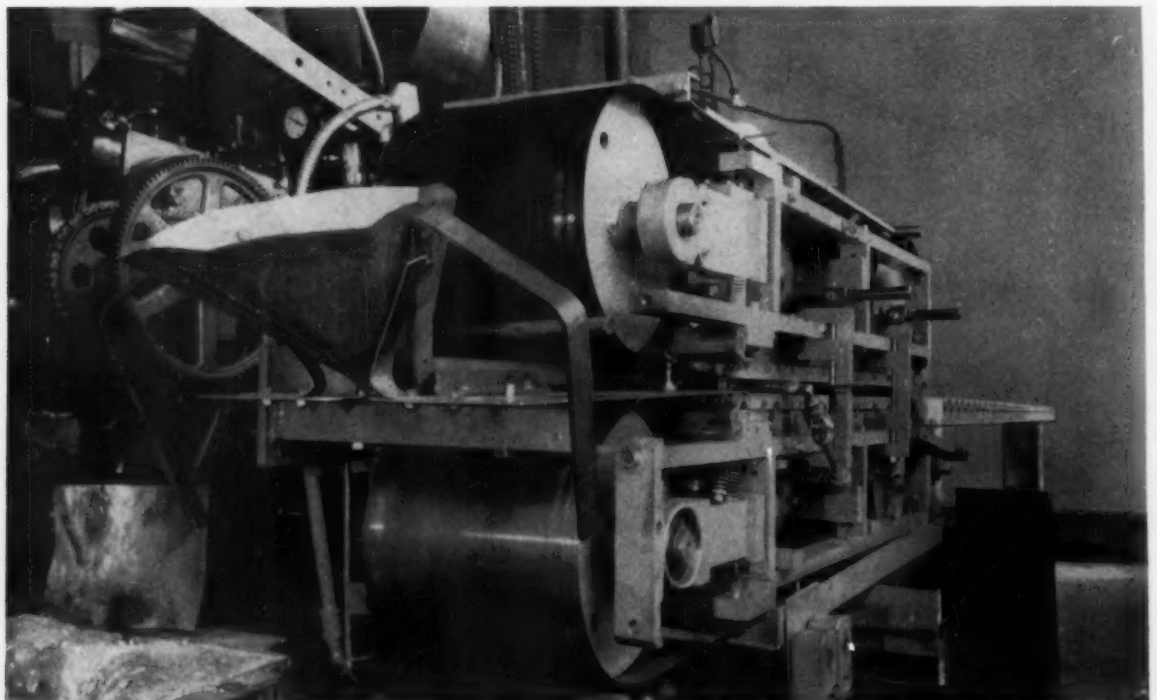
As-cast surface of aluminum slab, shown at the delivery end of the mill. The remarkably good surface finish is typical; the photograph has not been retouched in any way.
